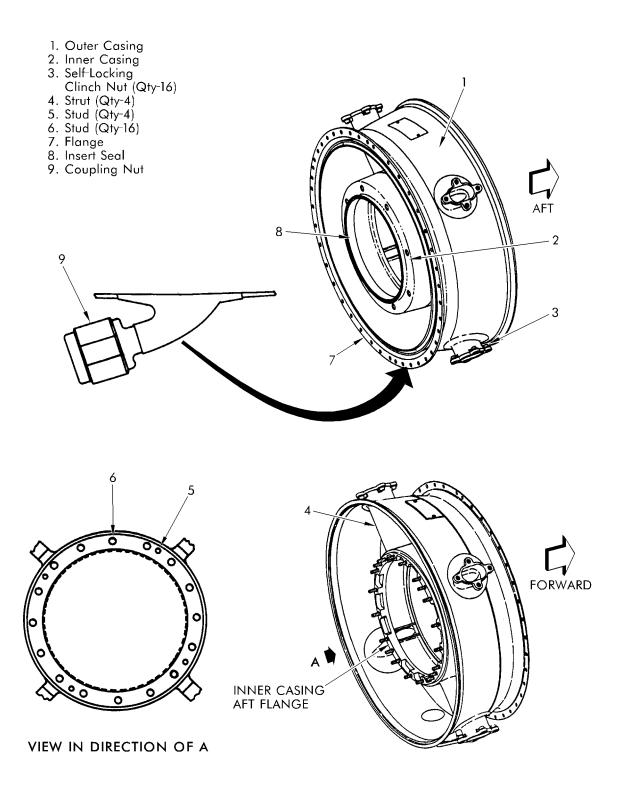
Power Turbine Module; Inspection (Sheet 2 of 2)
